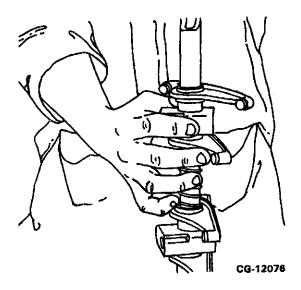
Assemble Rocker Arm Components with Shaft in Vertical Position
